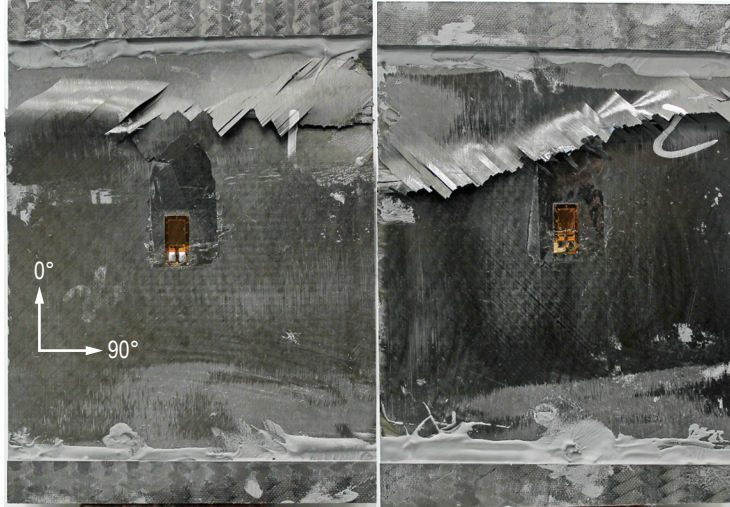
Photograph of both sides of compression failure of undamaged specimen.
